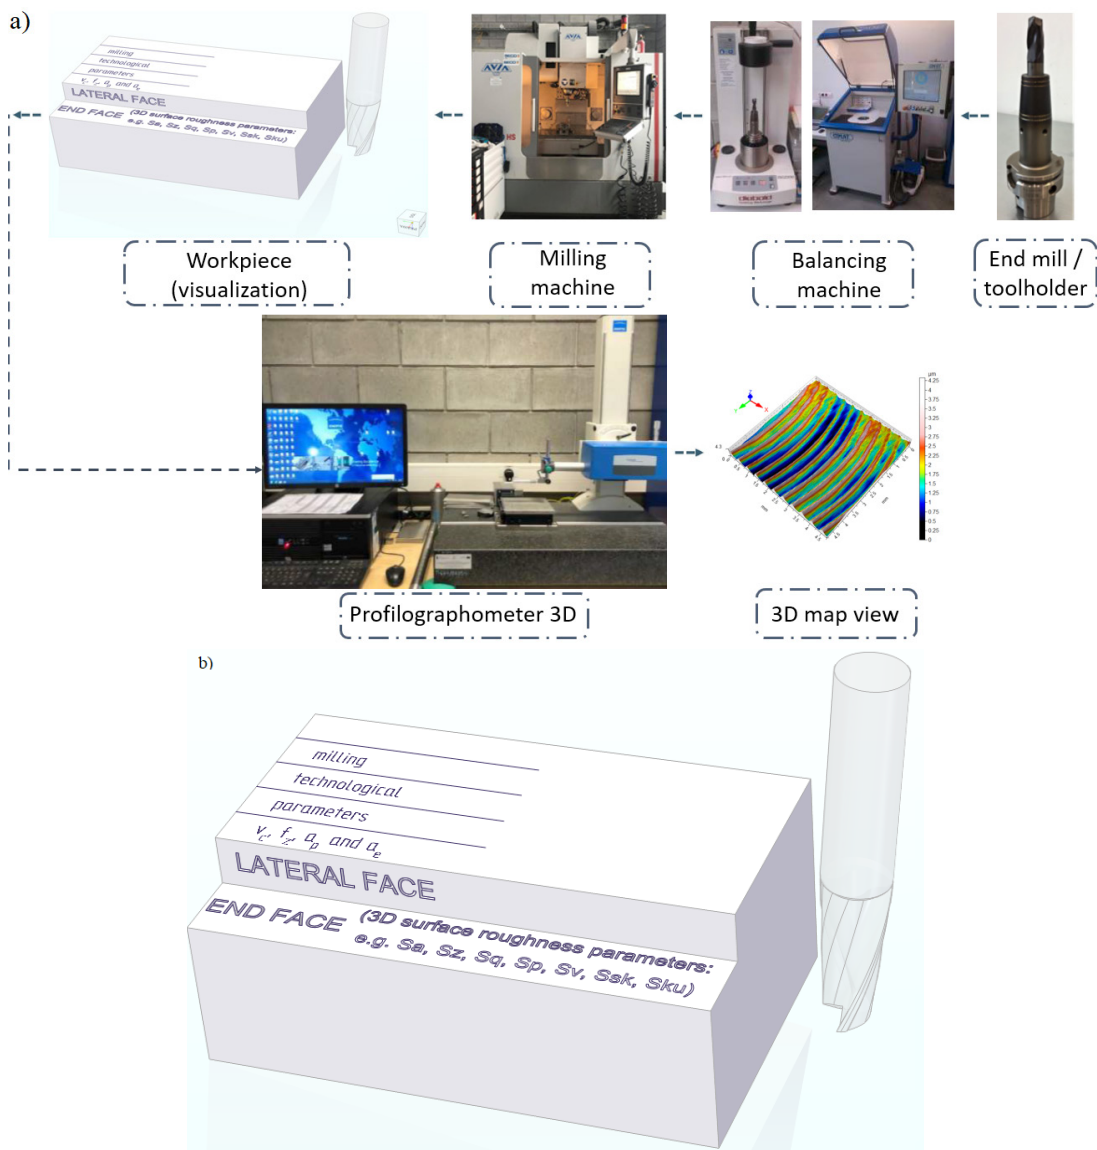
Research schematic: a) measuring equipment (e.g. end mill, milling machine and profilometer), and b) milling visualization with a 3D roughness measurement model for the end face on the workpiece
